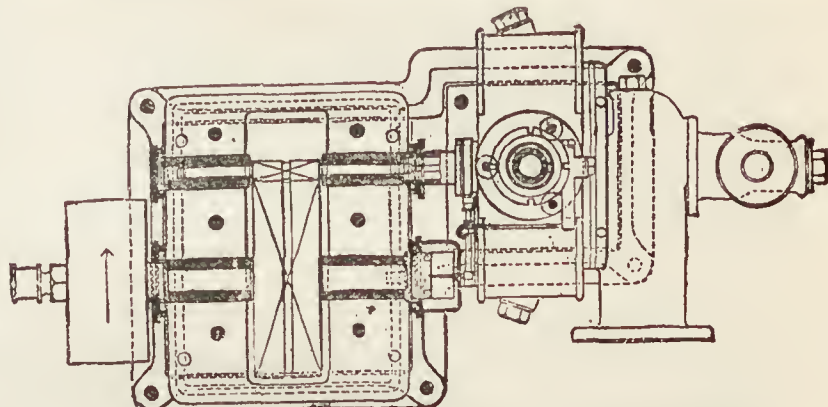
HORIZONTAL SECTION OF THE TURBINE.
